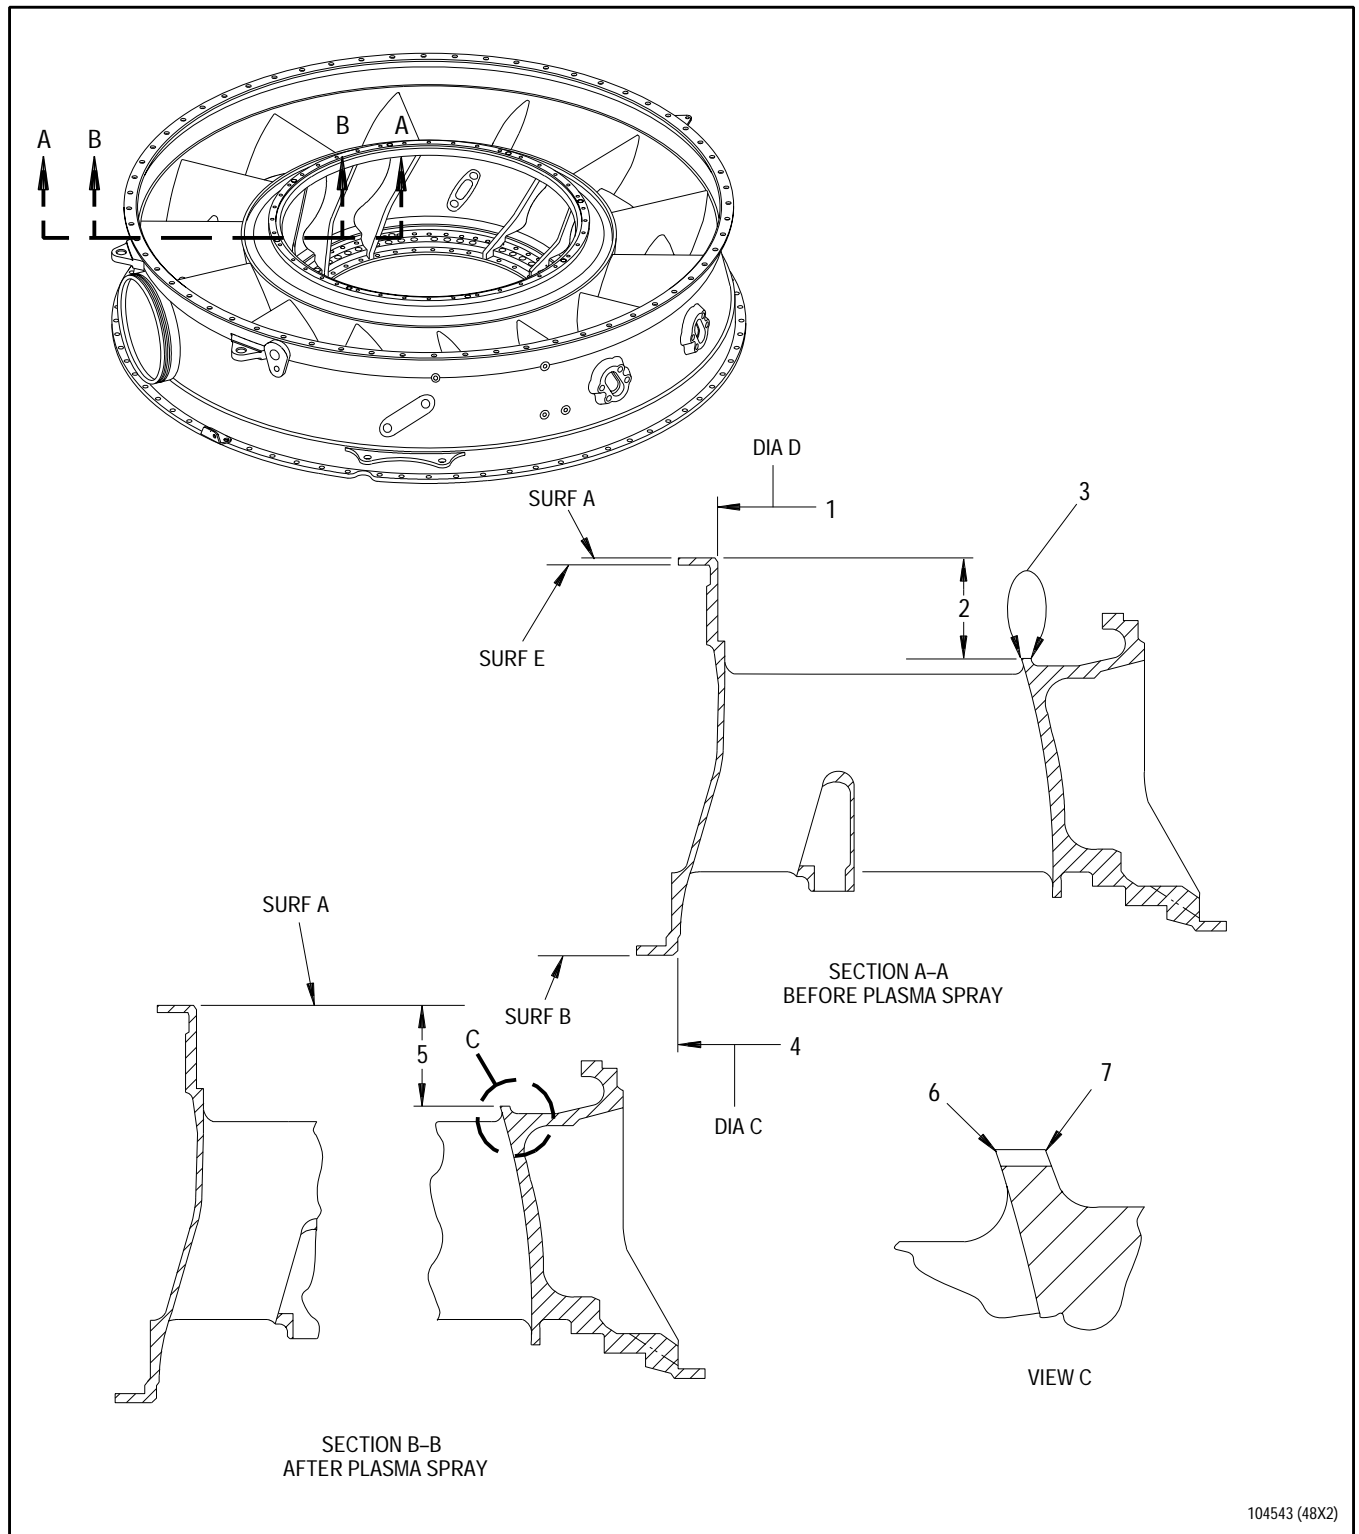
Compressor Intermediate Case Assembly - Inner Platform Leading Edge Repair
